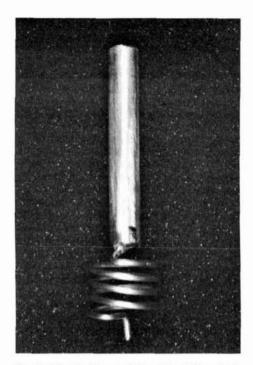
The loading coil is soldered to a hole drilled in the end of the brass rod, which then slips through a hole drilled in the top PVC cap.
